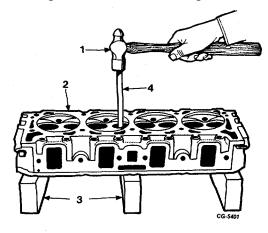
Removing Valve Guides with SE-17221. Hammer3. Support blocks2. Cylinder head4. Remover
